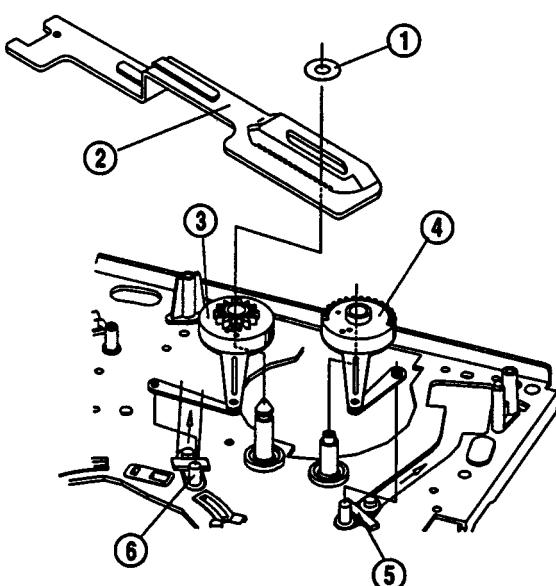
Reel belt, Loading Rack, Loading Gears, S/T slant pole Removal
